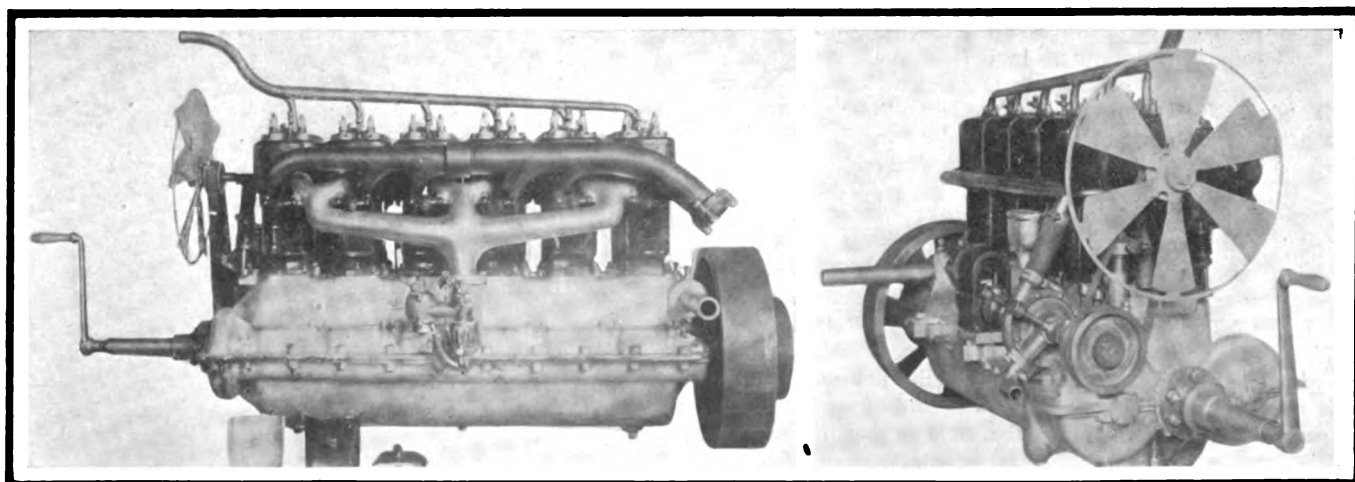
View of the left side of the motor used on the Halladay model 50, showing the manner in which both intake and exhaust valves are inclosed. Fig. 6—Quarter front view of model 50 motor
